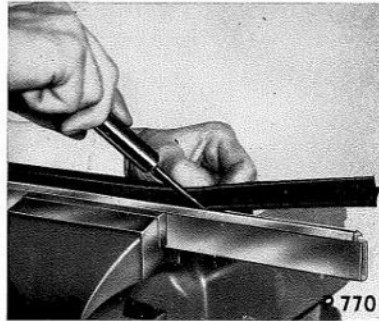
Fitting the rubber strip in the sliding door lower seal
